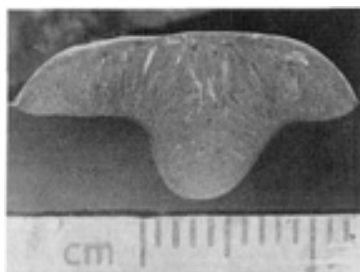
TRANSVERSE CROSS SECTION OF GAS-METAL ARC BEAD-ON-PLATE WELD IN CARBON STEEL TO SHOW DEEP PENETRATION IN THE WELD BEAD CENTER GENERATED BY MOLTEN ELECTRODE DROPLETS
